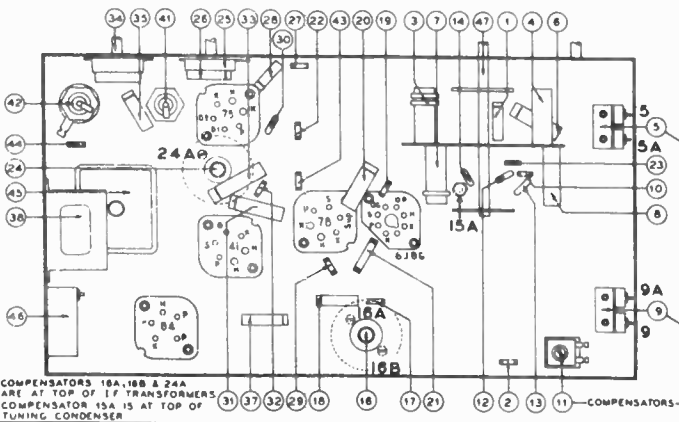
PART LOCATIONS, UNDERSIDE OF CHASSIS.
